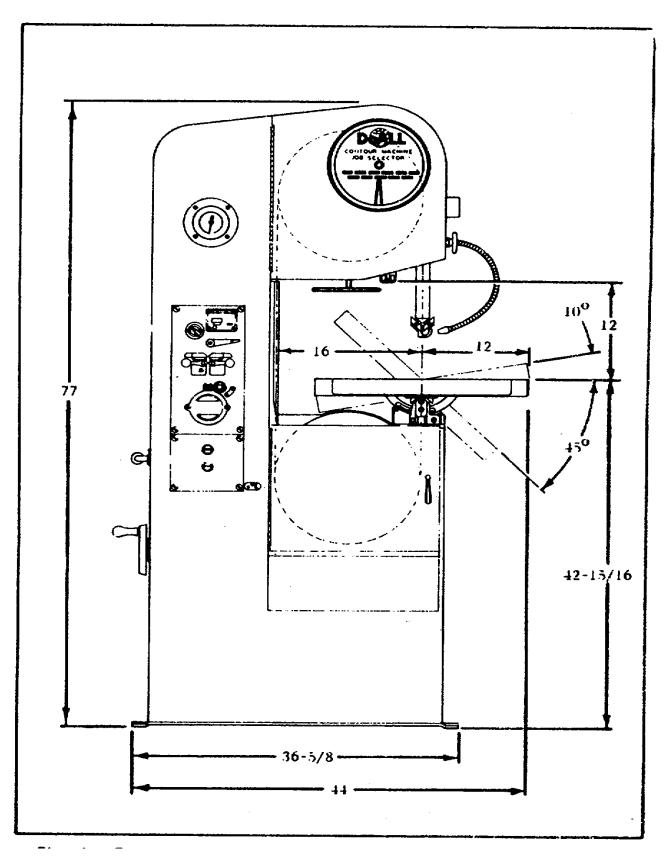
Front view of the Model 1612-0, showing overall dimensions.
